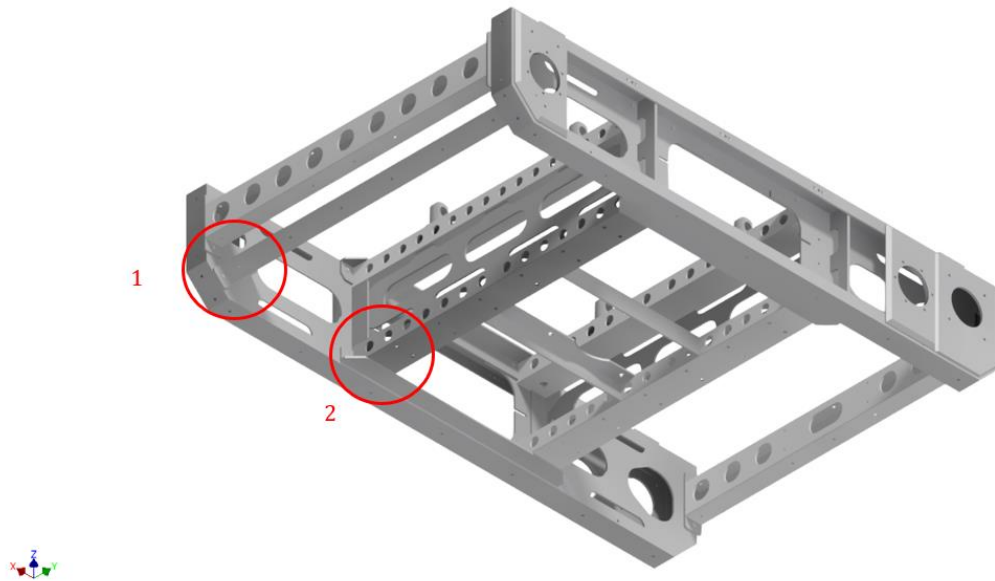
Critical load bearing welds in the bottom part of the skid
